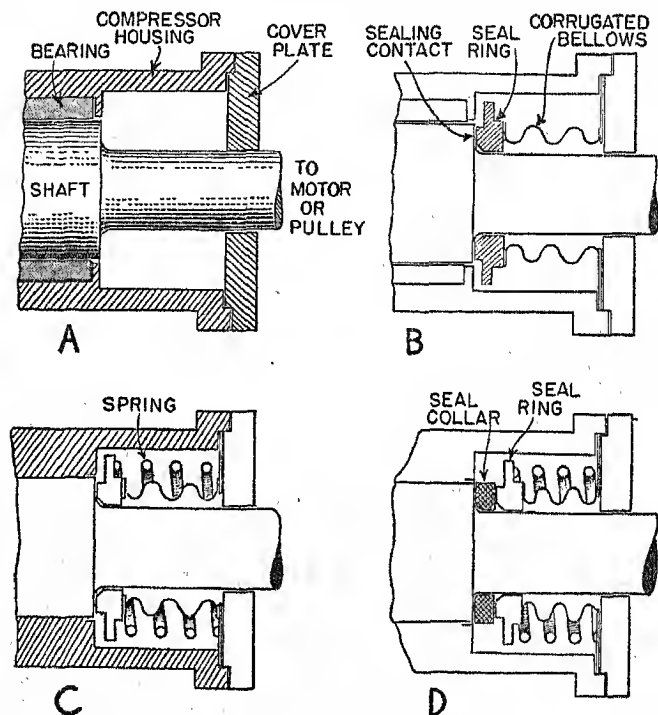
The Construction of One Style of Bellows Seal for a Compressor Shaft.
